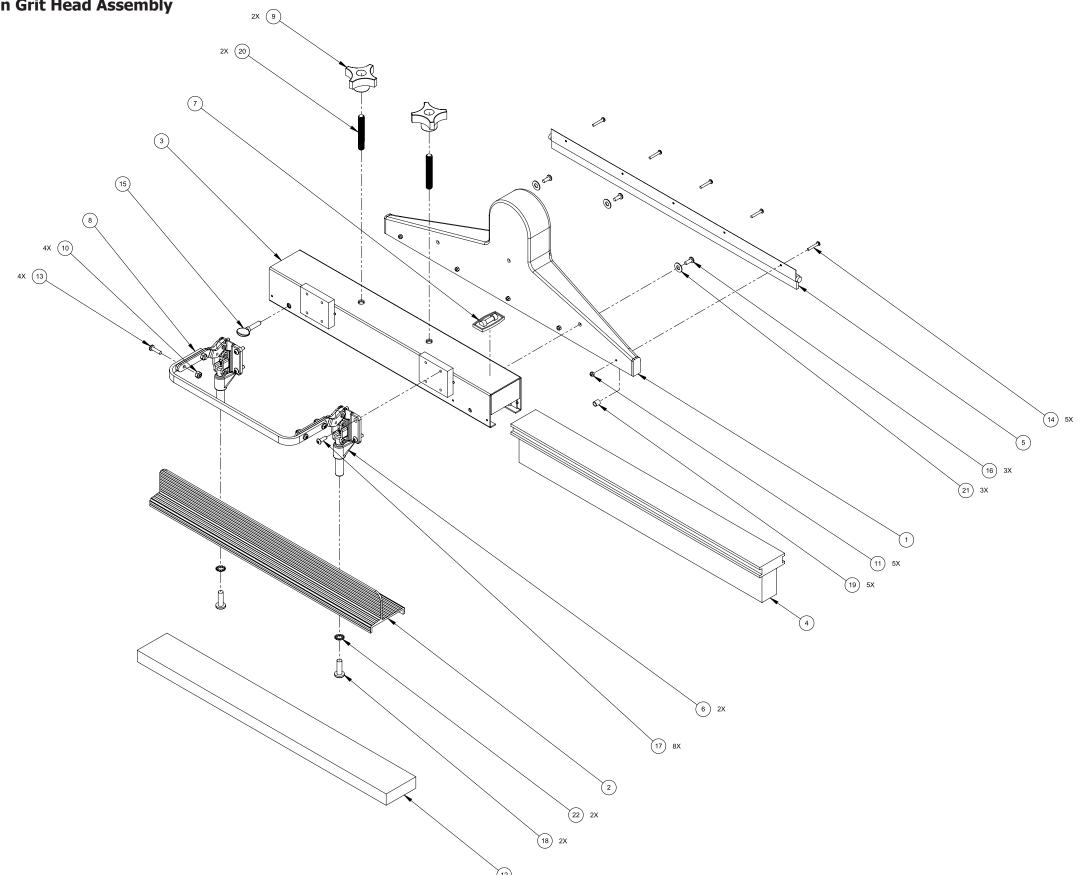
22" Nylon Grit Head Assembly 190-100-014 Rev. A
